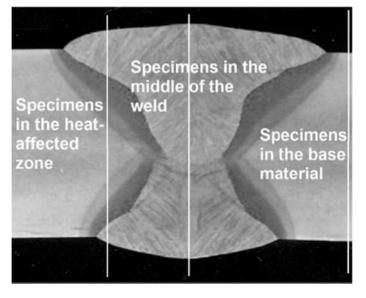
Cross-section of a submerged arc-welded steel pipe
